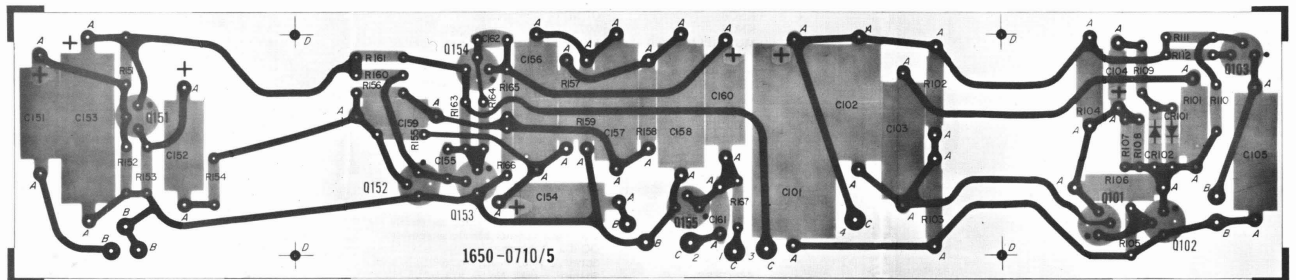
Etched circuit assembly (P/N 1650-2710).
